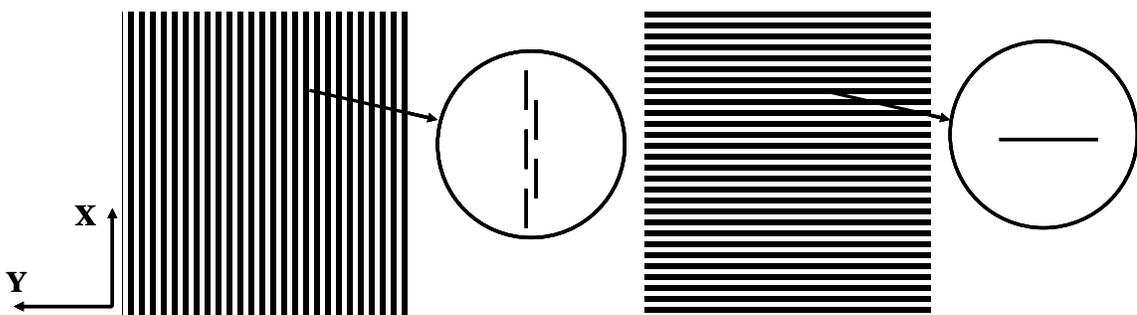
Array of parallel lines indicating proper alignment with the machine axes
